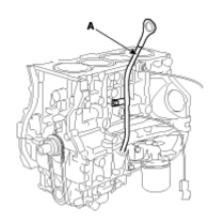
Identifying Oil Dip Stick Courtesy of HYUNDAI MOTOR CO.
